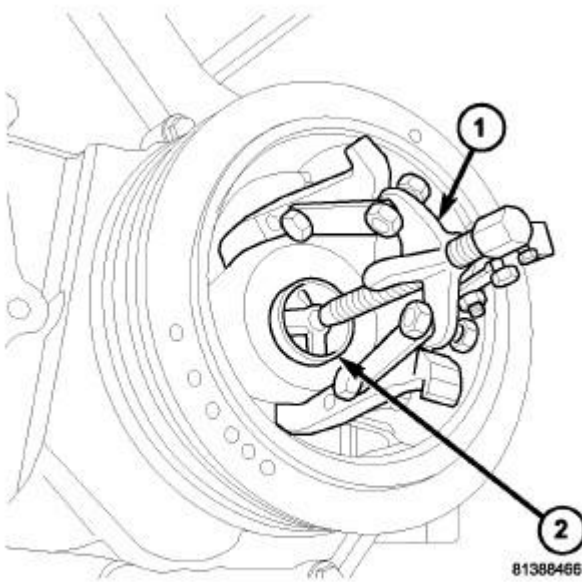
CRANKSHAFT DAMPER REMOVAL
